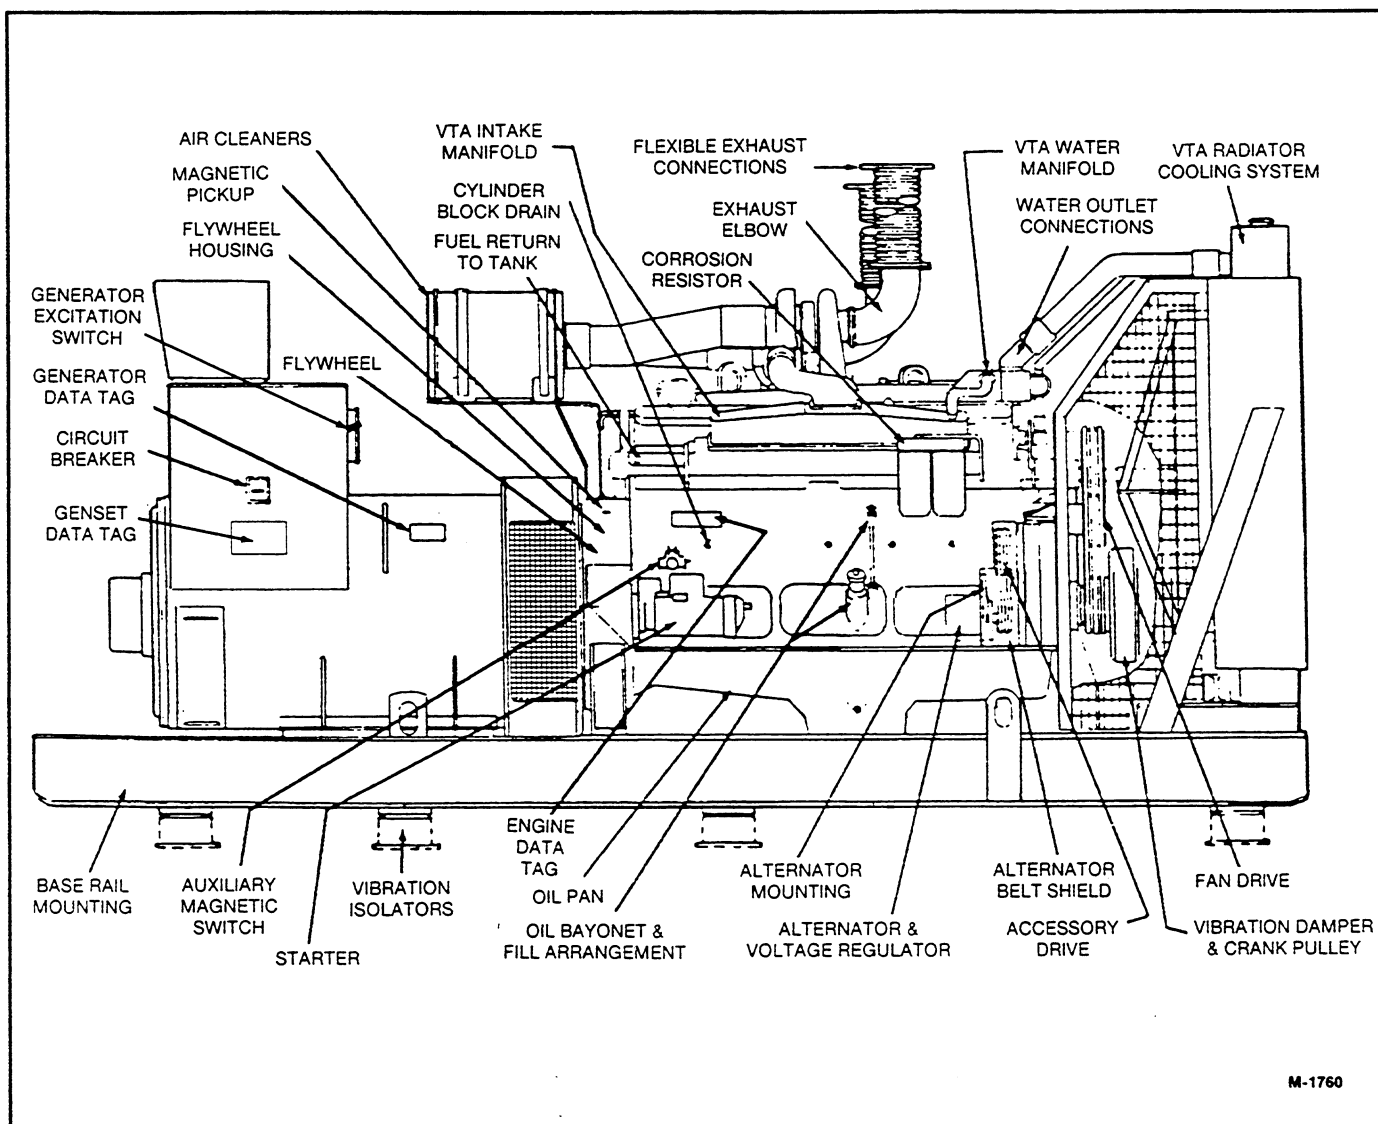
TYPICAL VTA-28 GENERATOR SET OUTLINE DRAWING (RIGHT SIDE)
